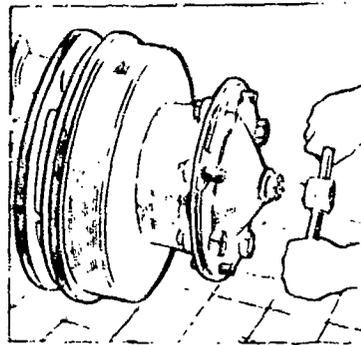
Removing the Hub and Brake Drum Using a Puller.
